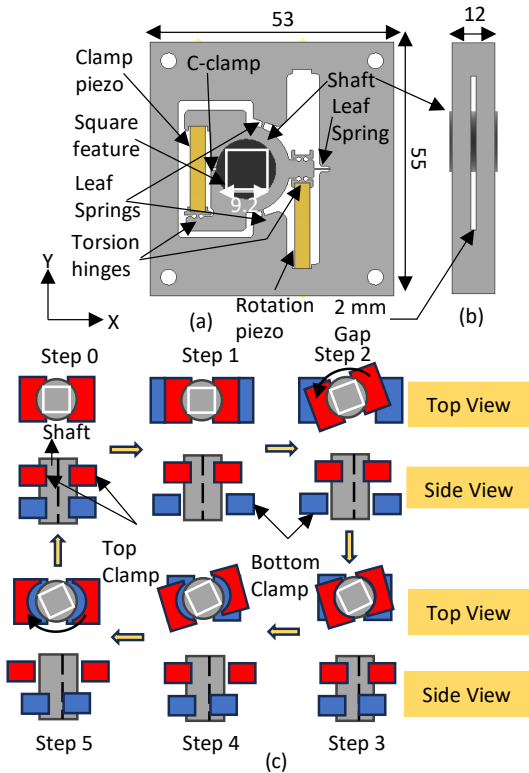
Schematic showing BAM-1 (a) Top view (b) side view, and (c) steps of actuation for single cycle of rotation (all dimensions are in mm). be achieved. At rest, the shaft is held by both—top and bottom—clamping units.
